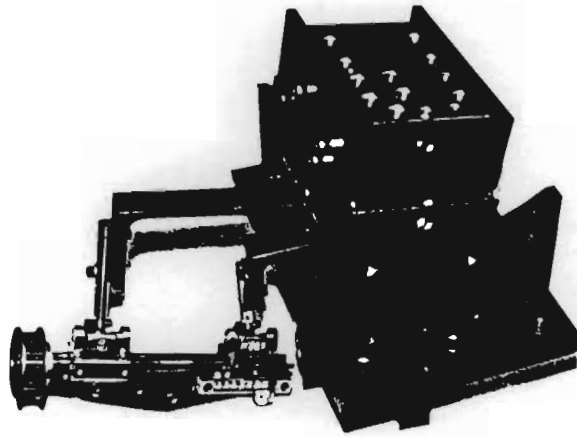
[d] Tool orientator configuration for side rake adjustment.
